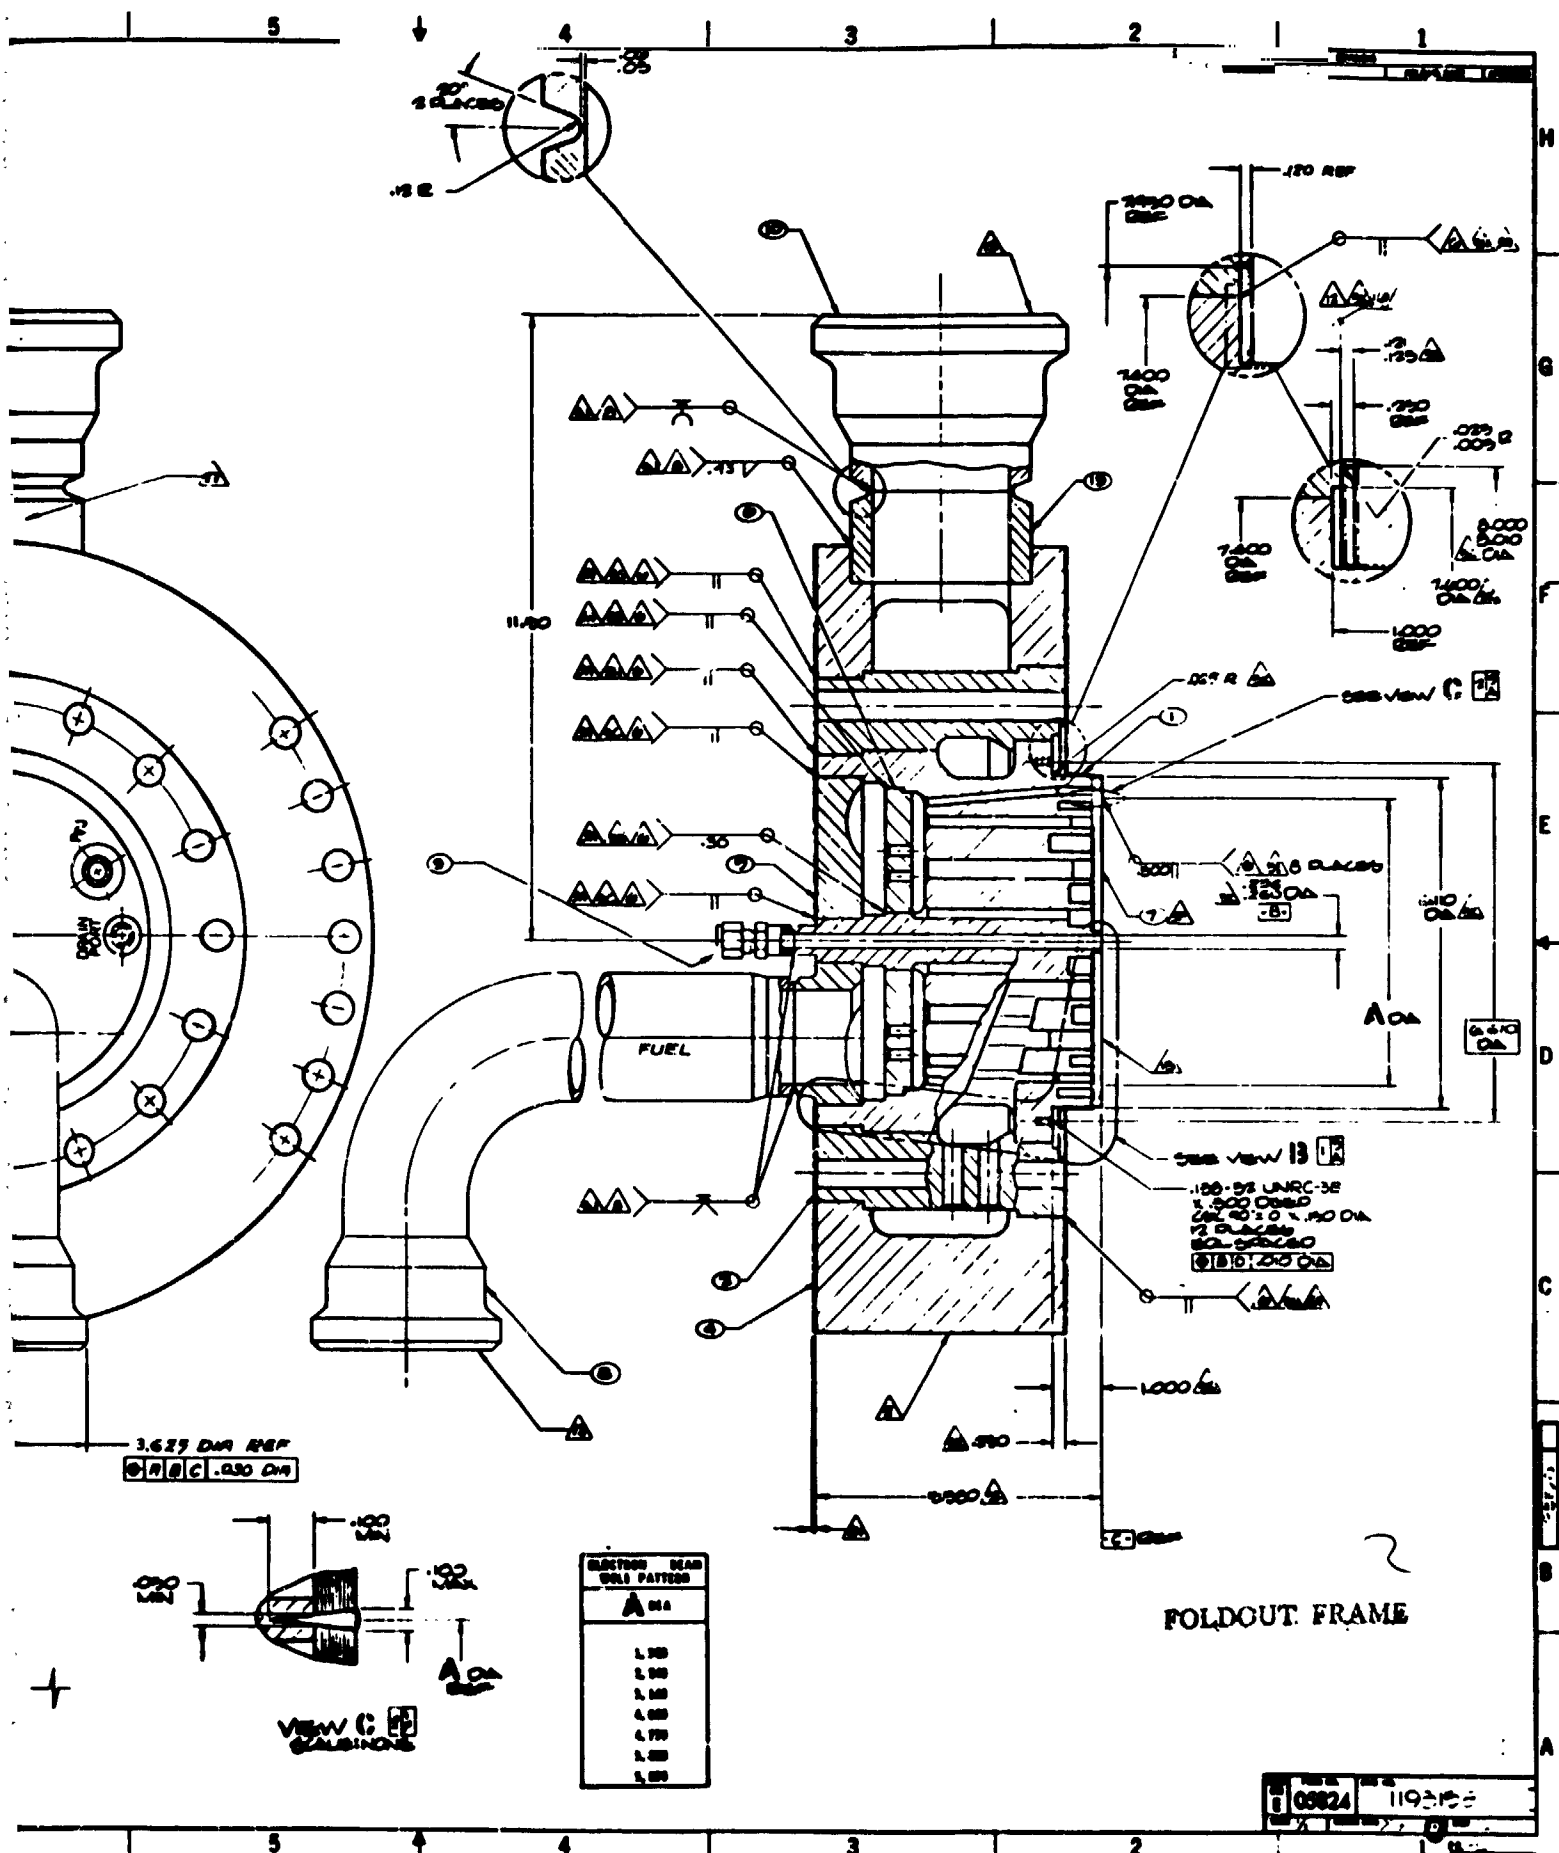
Injector Body Subassembly (Sheet 1 of 2)
